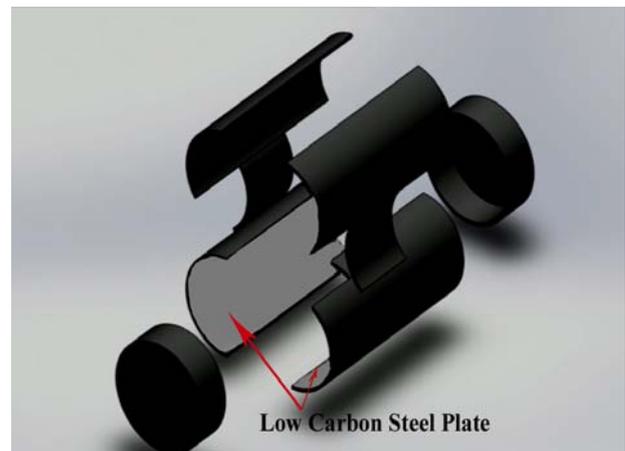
Magnetic shielding Enclosure of the ROV prototype
